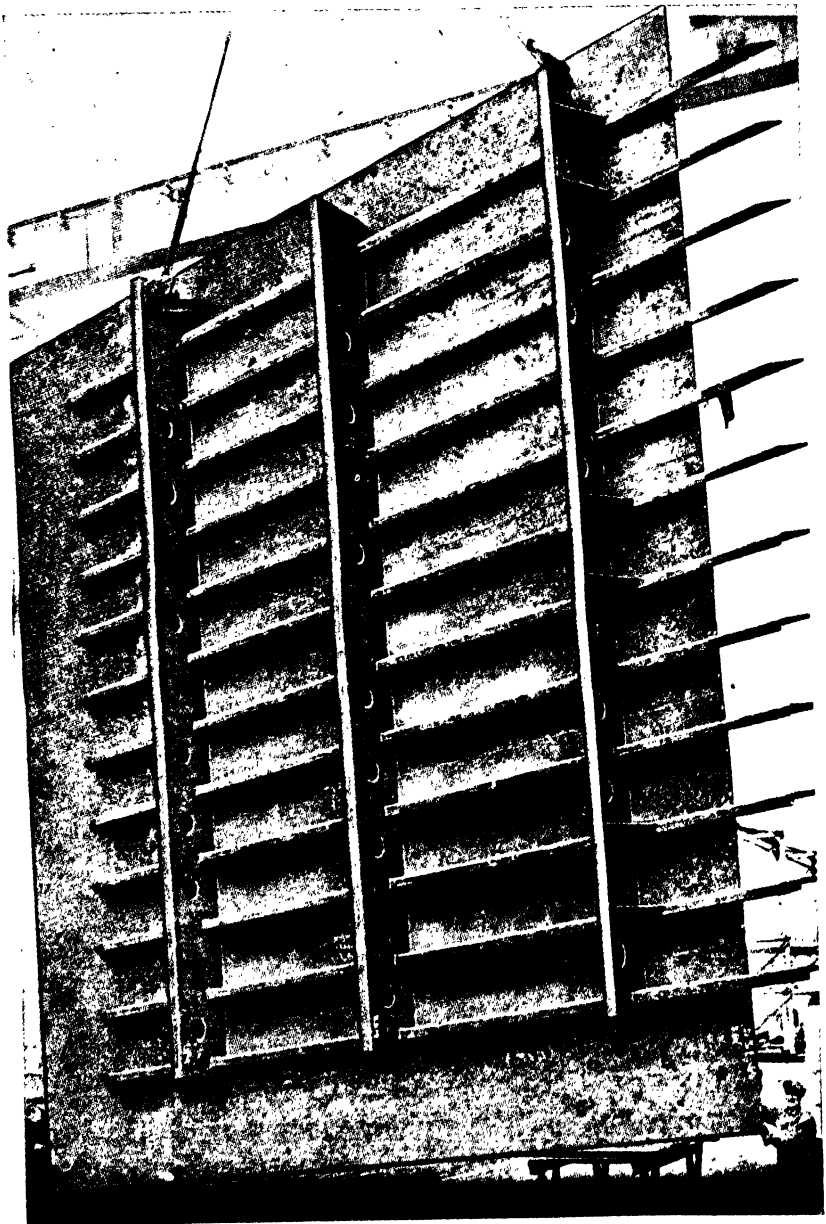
Transverse Bulkhead, Welded Structure
